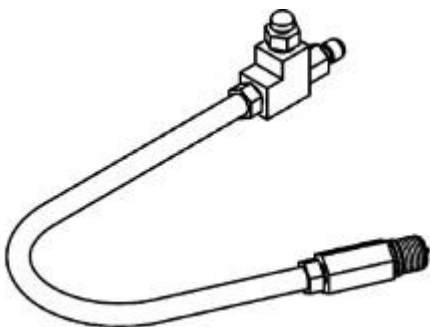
ADAPTER, PRESSURE PEP - 8116
